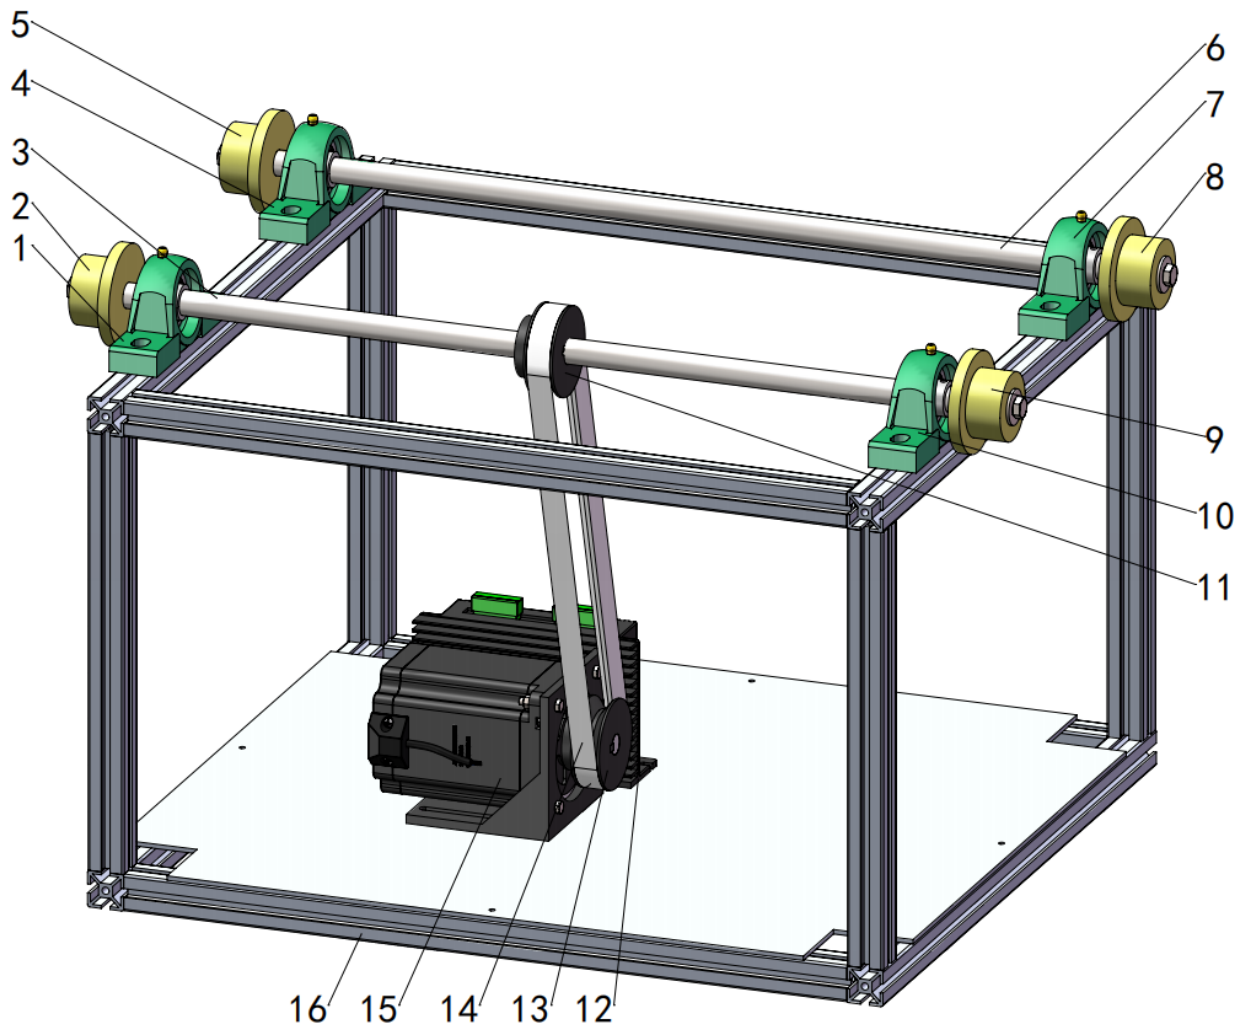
Schematic diagram of the self-propelled system. 1, 4, 7, 10. Bearing seat; 2, 5, 8, 9. T-type wheel; 3. Drive shaft; 6. Driven shaft; 11. Driven pulley; 12. M860 driver; 13. Active pulley; 14. A-type belt; 15. Self-propelled motor; 16. Mounting bracket.
